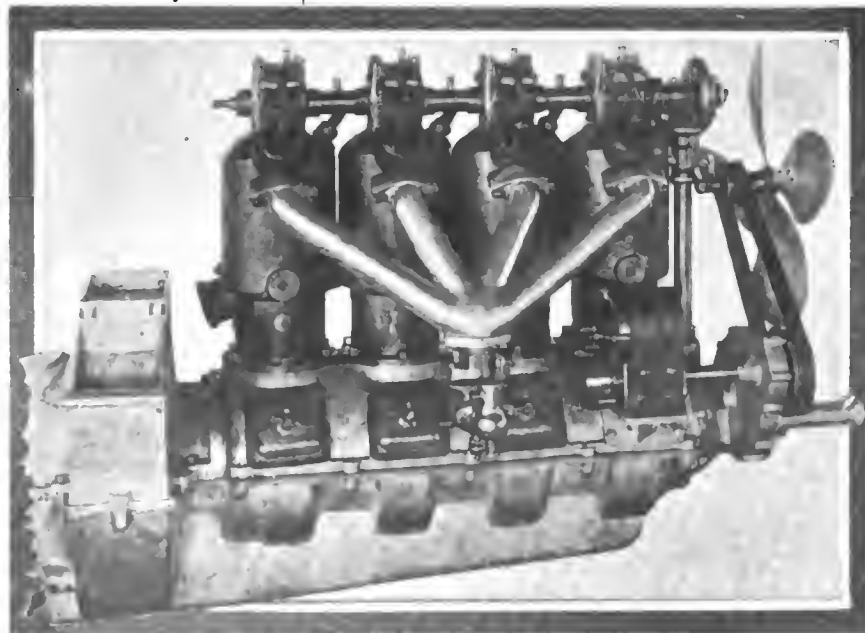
Intake side of Model 50 motor, showing carbureter, magneto and crankcase broken off back of flywheel
